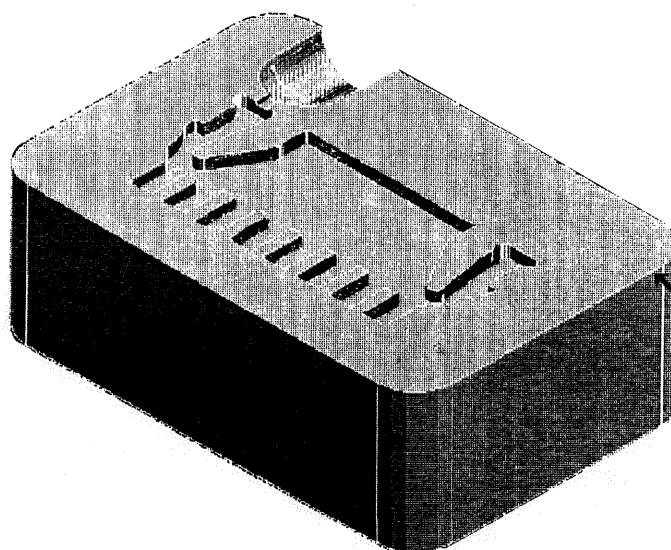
CAD Rendering of an Injection Molding Tooling Insert.
